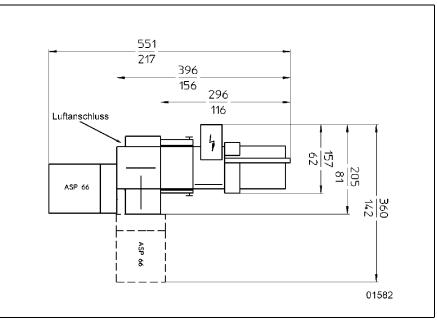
Floor plan K 800.2 - Pile feeder (measure cm)
